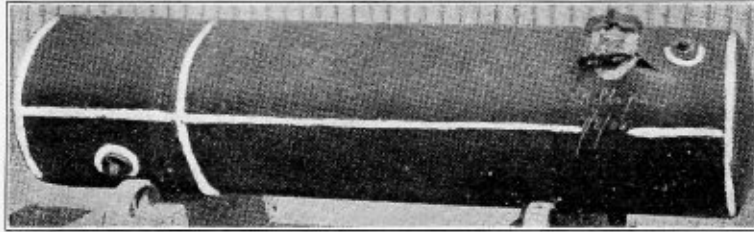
Welded Cylinder Tested to Destruction
